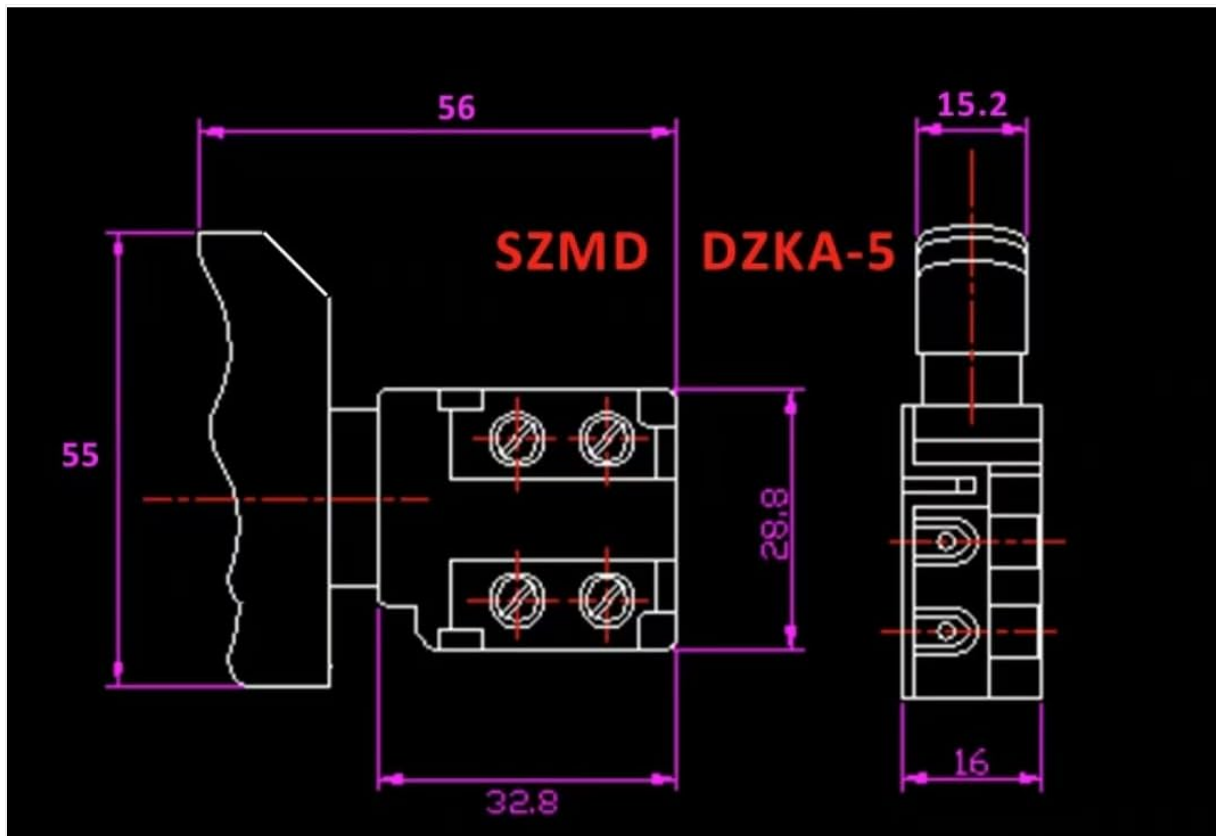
Dimensional drawing of the SZMD DZKA-5 Trigger Switch. This technical drawing provides precise measurements in millimeters, useful for compatibility assessment and installation planning.
